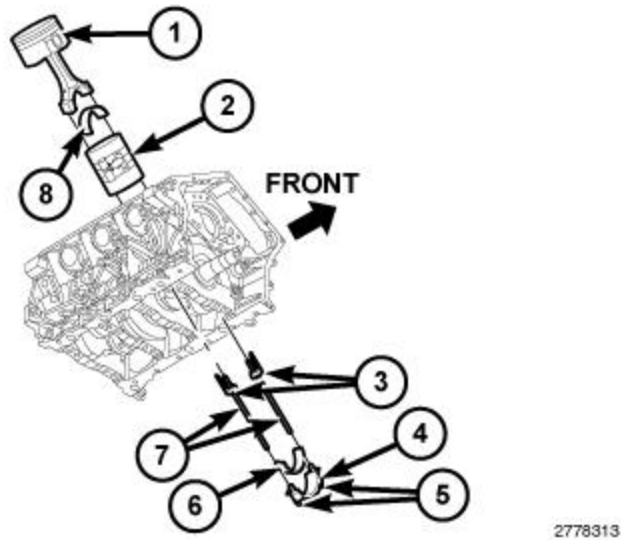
Piston, Connecting Rod Cap, Bolts, Plastic Guide Plates & Guide Pins
